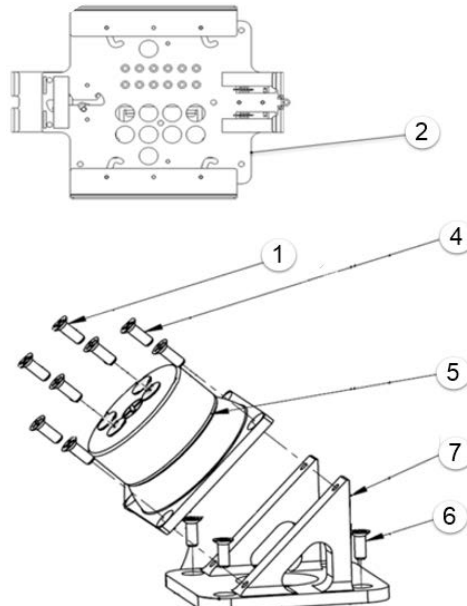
Tablet EFB Mount With P/N 48-0393-01 Wedge
